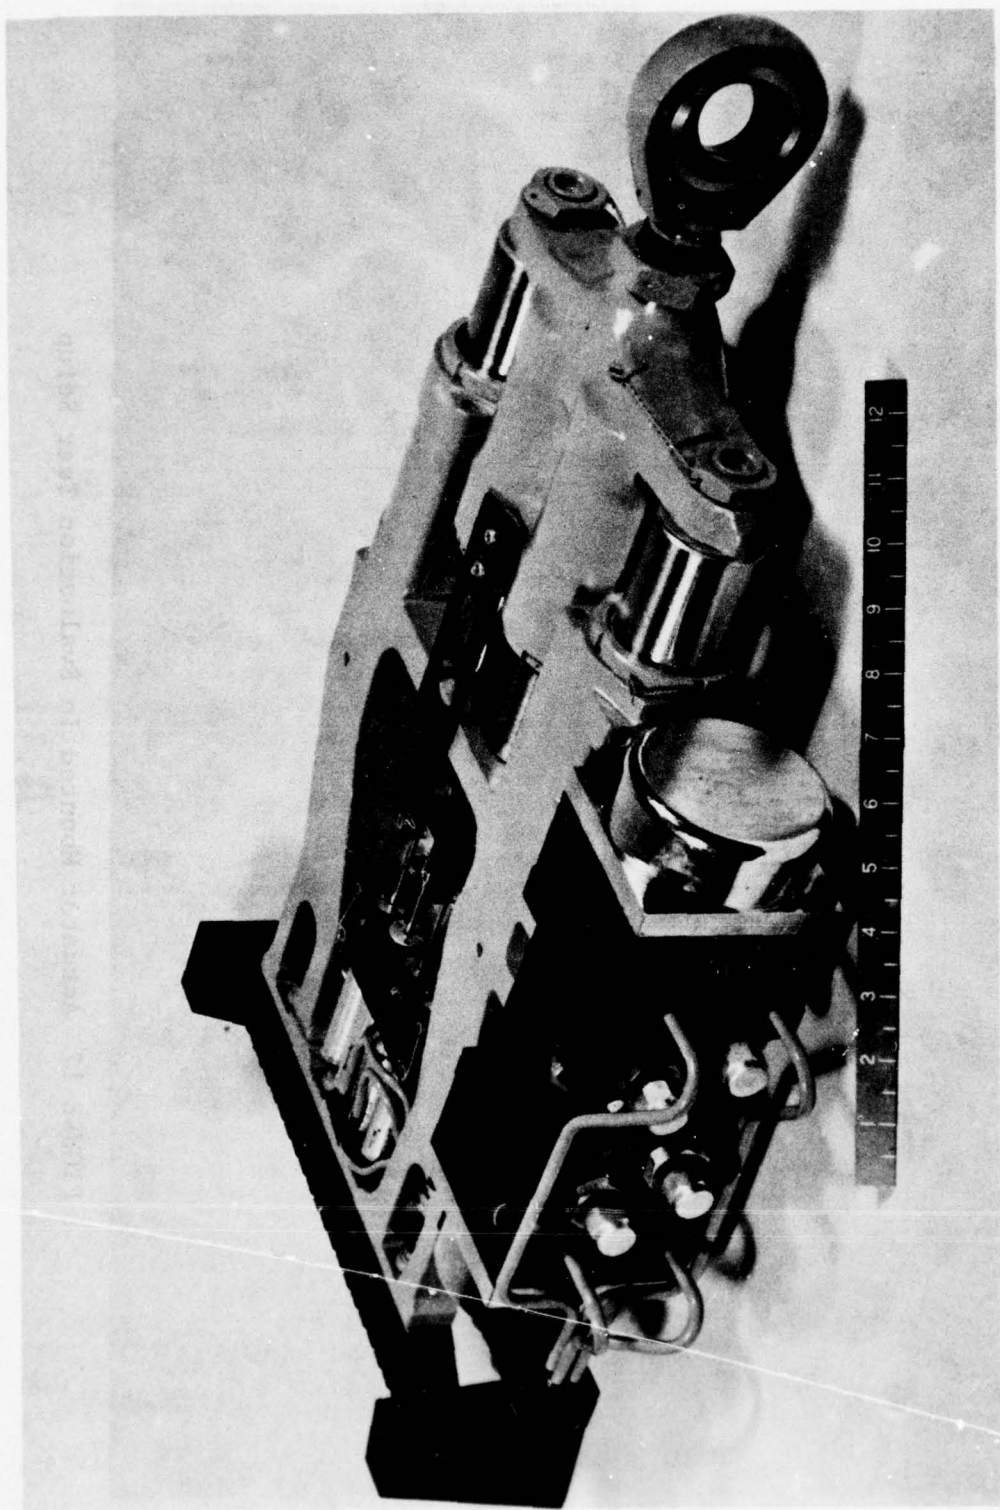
Valve and Driver Mounted on F-4E Actuator
